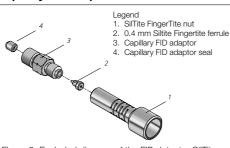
Exploded diagram of the FID detector SilTite FingerTite assembly.
